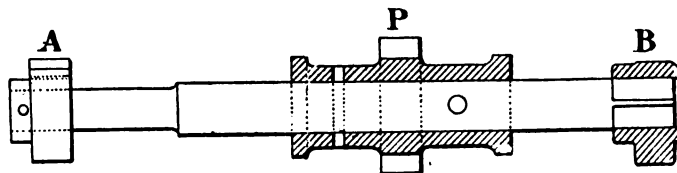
THE EXHAUST-VALVE AND IGNITION CAM SHAFT.
